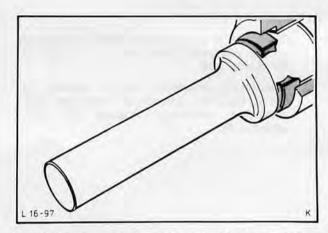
Fit oil seal with Special Tool No. 16-015/16-016
